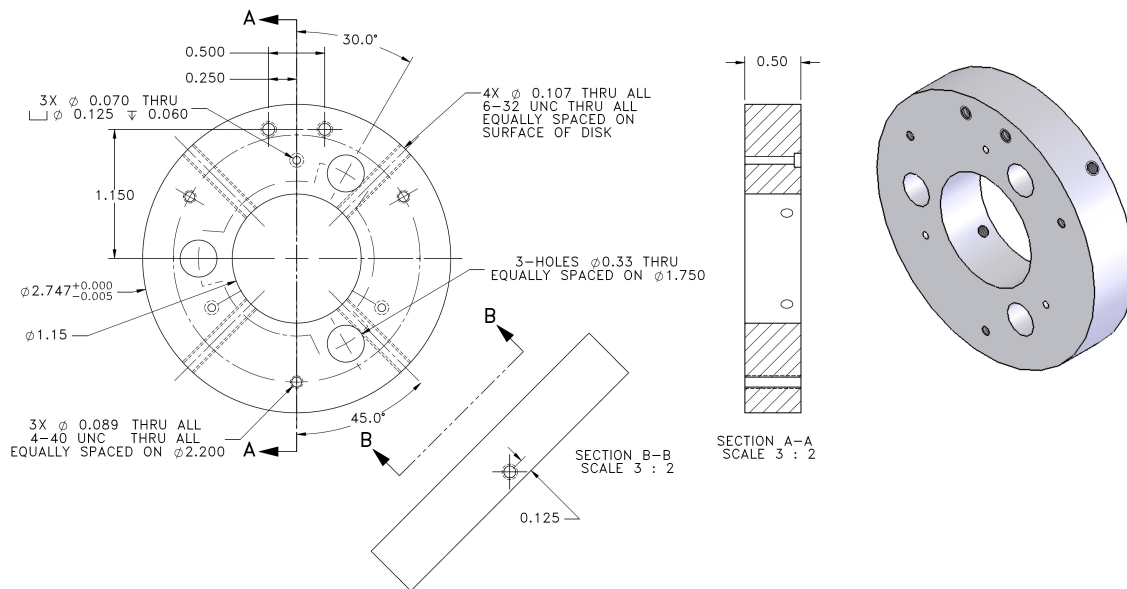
Technical drawing of the RFA rear disk. All measurements are in inches
